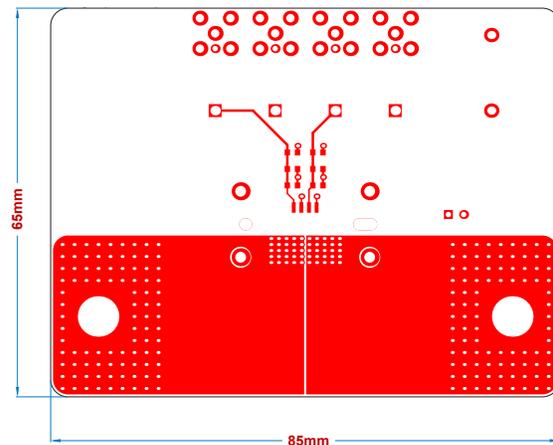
LC/LZ PCB Layout Reference View With In-Pad Vias
